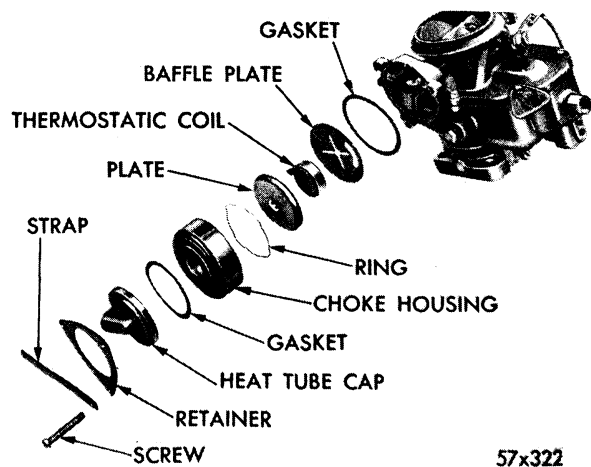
Removing or Installing Choke Baffle Plate and Gasket
